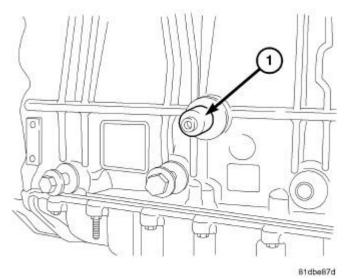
Crankshaft Locking Tool Courtesy of CHRYSLER LLC
